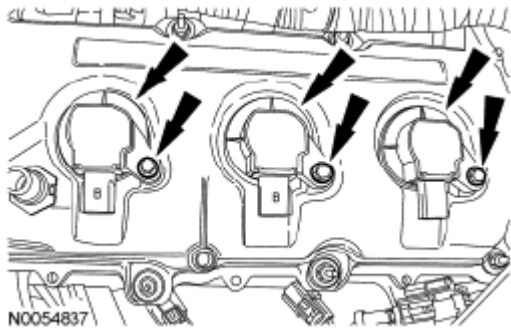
Locating Bolts And Coil-On-Plug Assemblies
